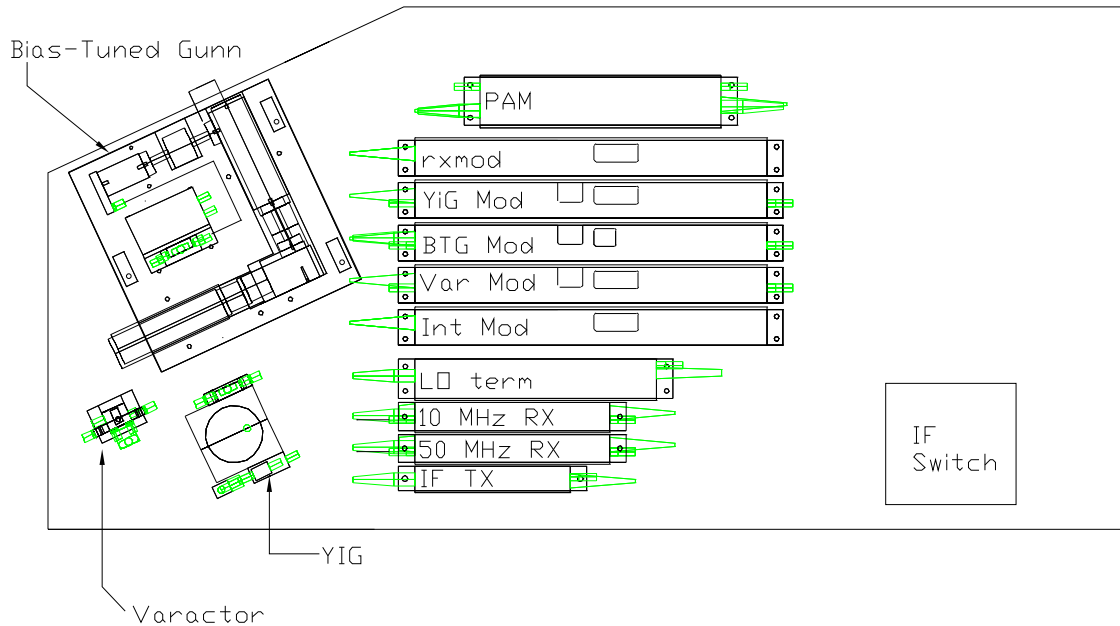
Layout of Modules in the Ebox. Connectors are shown in green.
